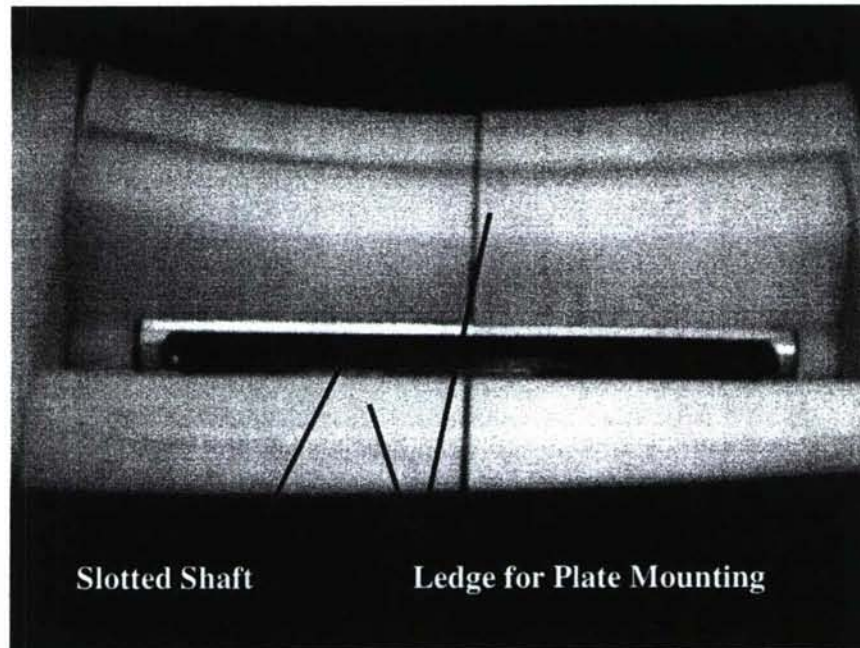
Slotted Shaft Valve Installed in a Blowing Plenum Chamber
